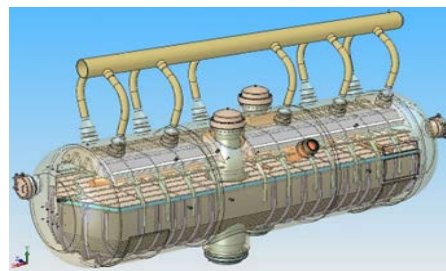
Horizontal steam generator PGV-1000 of the WVER-1000 reactor
